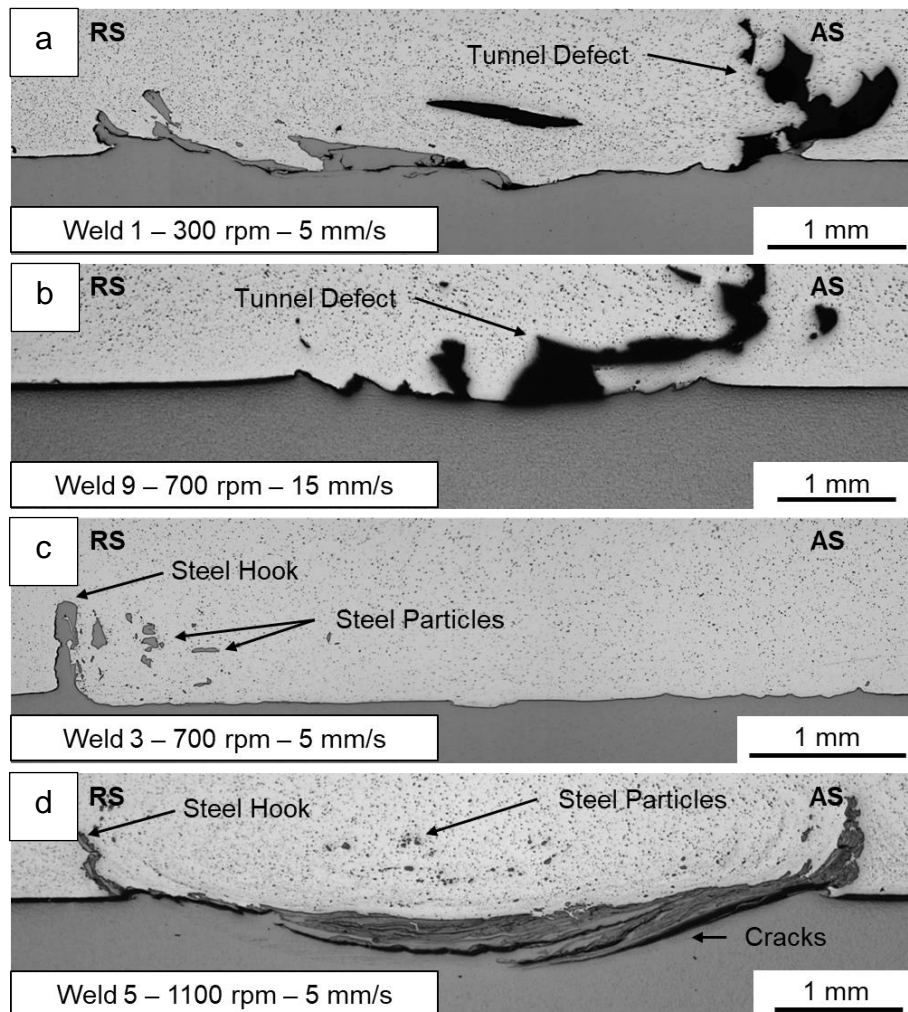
Macrostructure of the welds produced by FSW using welding speed and rotational speed of (a) 5 mm/s and 300 rpm, (b) 15 mm/s 700 rpm, (c) 5 mm/s and 700 rpm, and (d) 5 mm/s and 1100 rpm.
